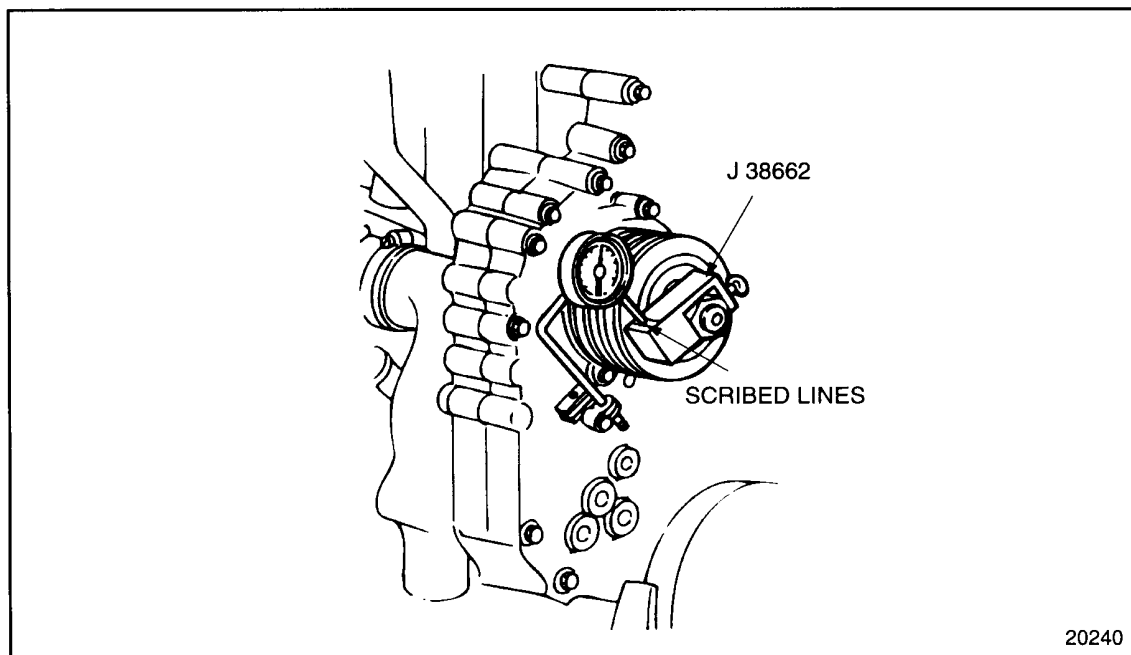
Accessory Drive Gear-to-Bull Gear Lash Measurement
